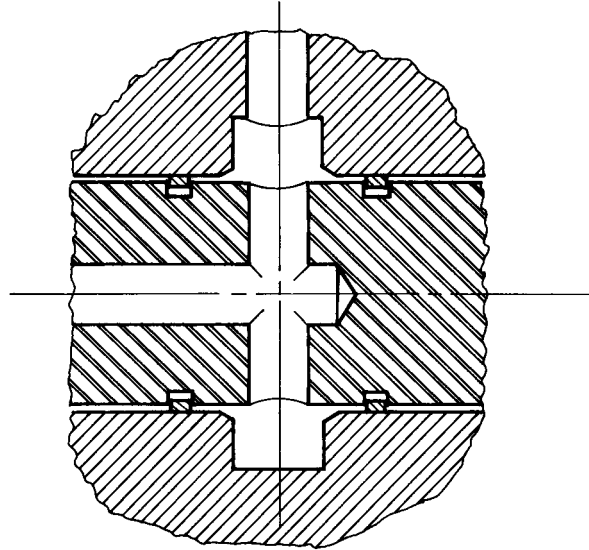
Metal seal ring application on a rotating shaft.
